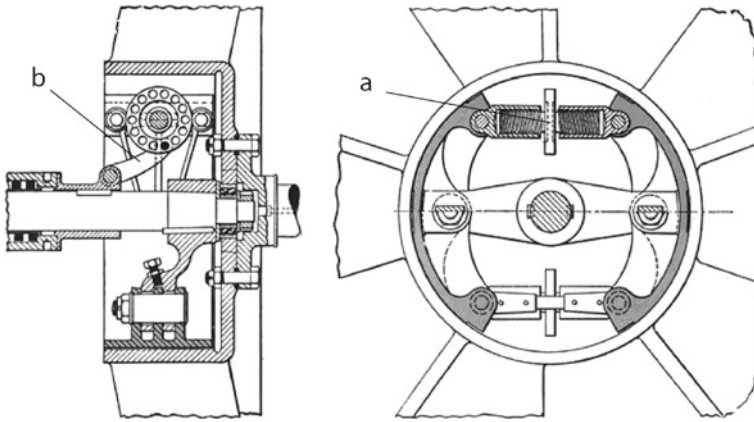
Radial shoes clutch. The shoe displacement is caused by a screw mechanism *a*, operated by the clutch pedal through a crank *b* (from Genta and Morello 2009)
